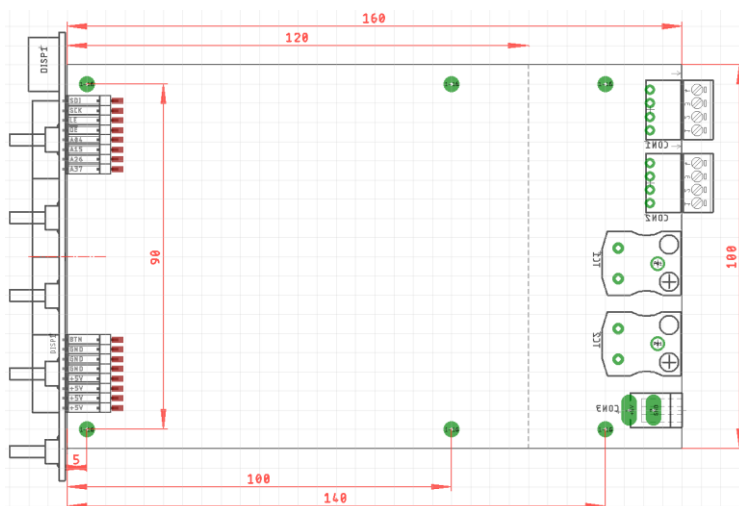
Recommended layout of important parts. Display on the front panel, all connectors on the back panel
